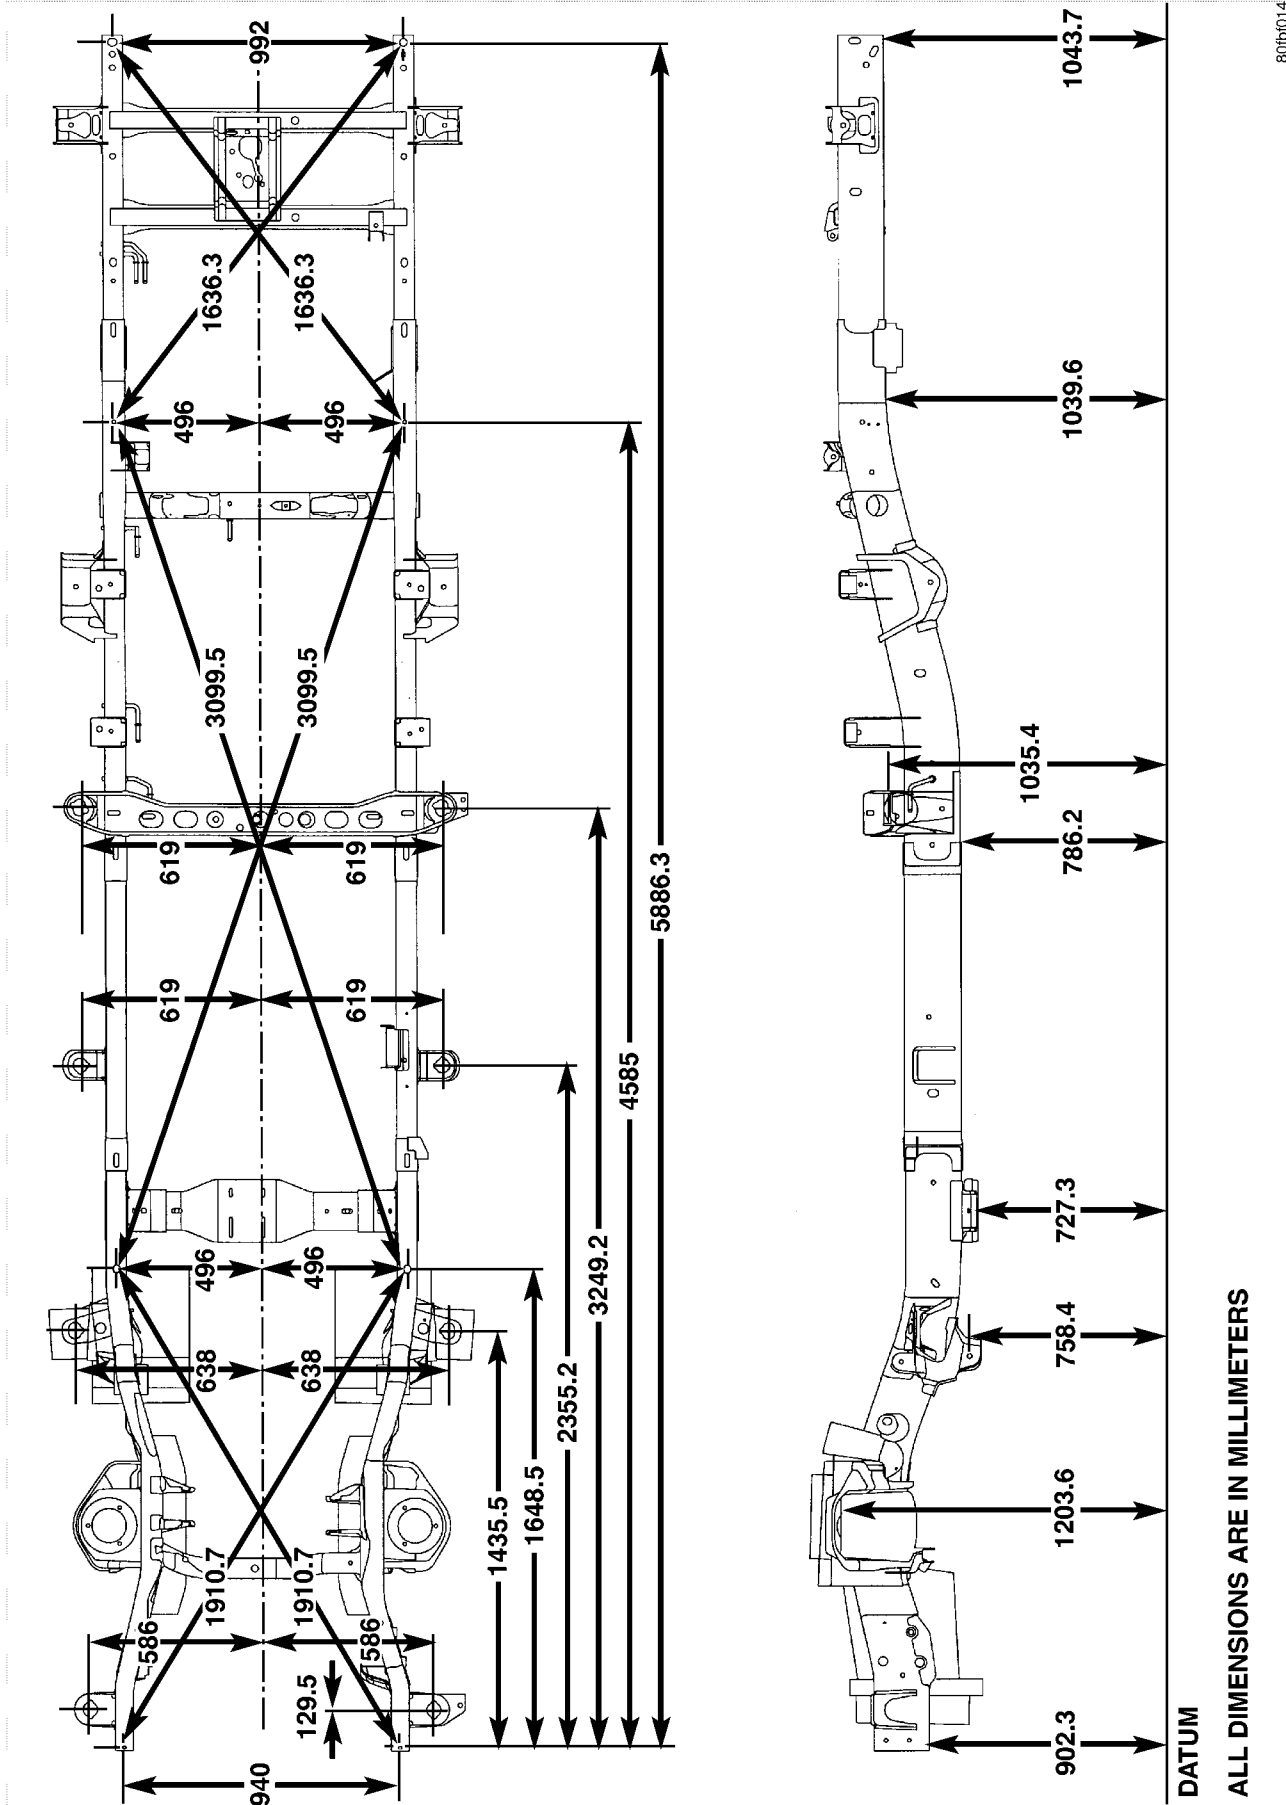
160.5 IN WHEELBASE - HEAVY DUTY - 4 WHEEL DRIVE
